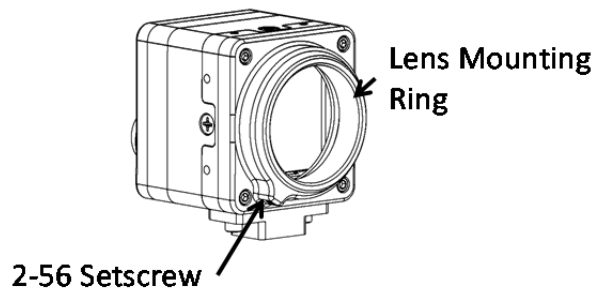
Location of Setscrew to Loosen Lens Mounting Ring for Focus Adjustments
